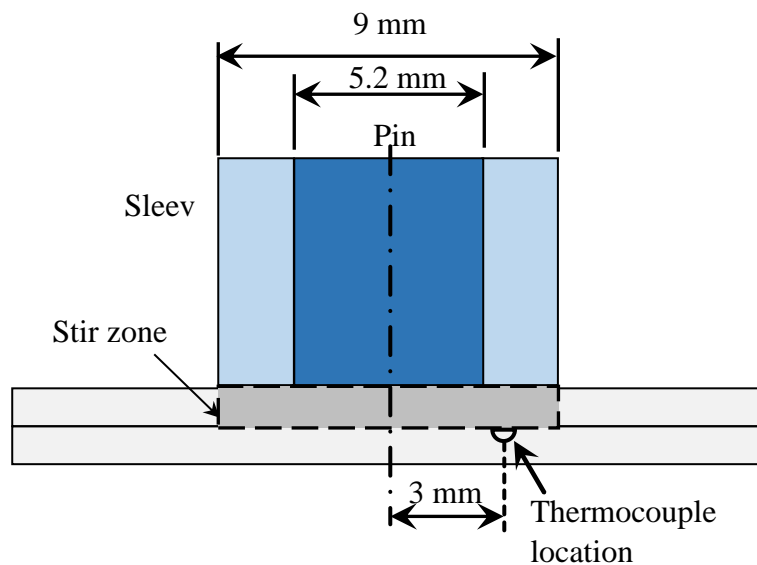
Schematic illustration of the thermocouple location for the dissimilar AZ31-H24 magnesium alloy to AA6111-T4 aluminium alloy welding.
